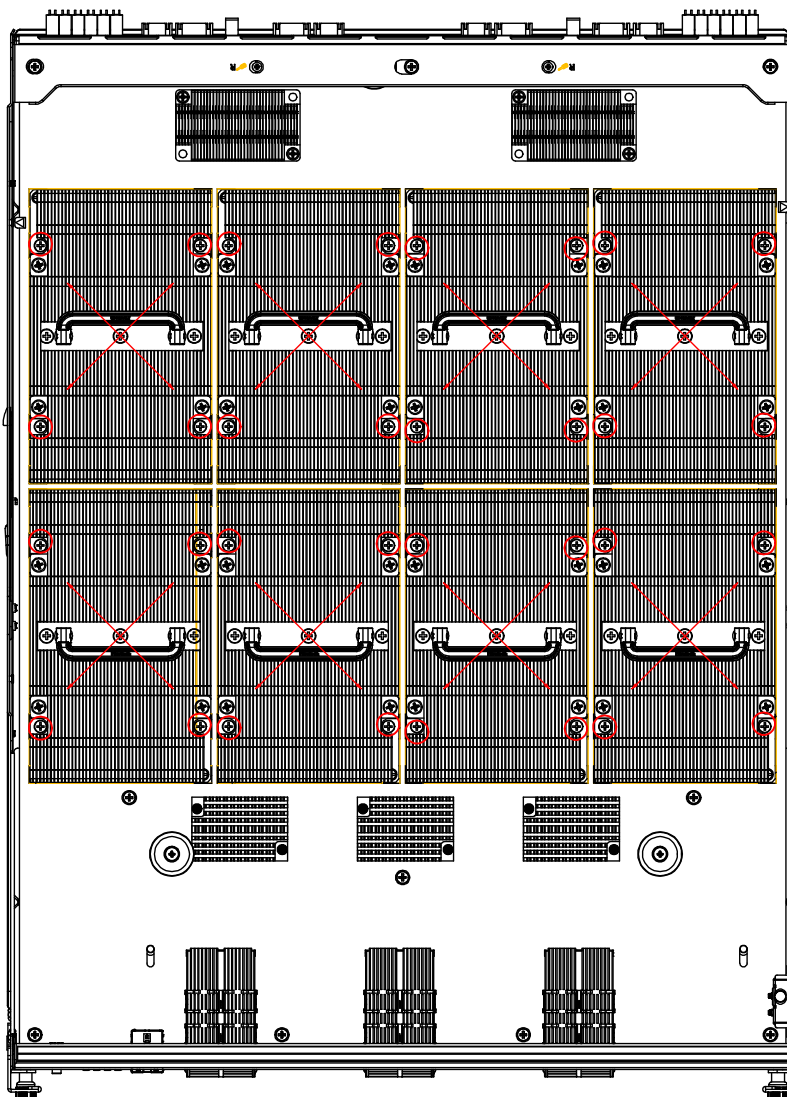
Removing Screws of Gaudi OAM Modules Diagonally
